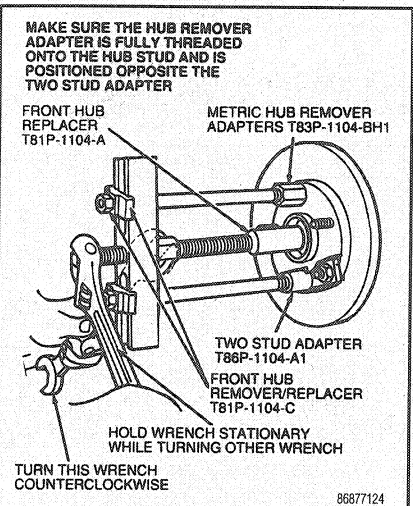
Separate the outboard CV-joint from the hub using front hub remover tool T81P-1104-C or equivalent, and metric adapter tools T83P-1104-BH, T86P-1104-AI and T81P-1104-A or equivalent, then remove the halfshaft assembly from the vehicle
